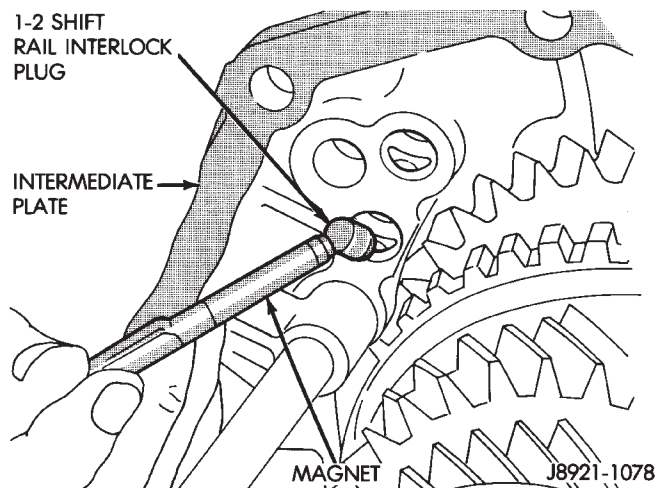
Remove 1-2 Shift Rail Interlock Plug
